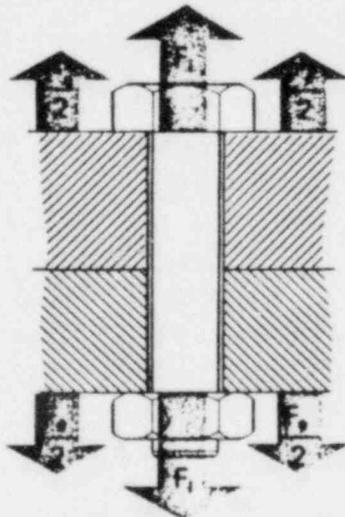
Simple bolted joint with axial tensile preload on bolt F_1 and axial tensile external load on joint F_e .
